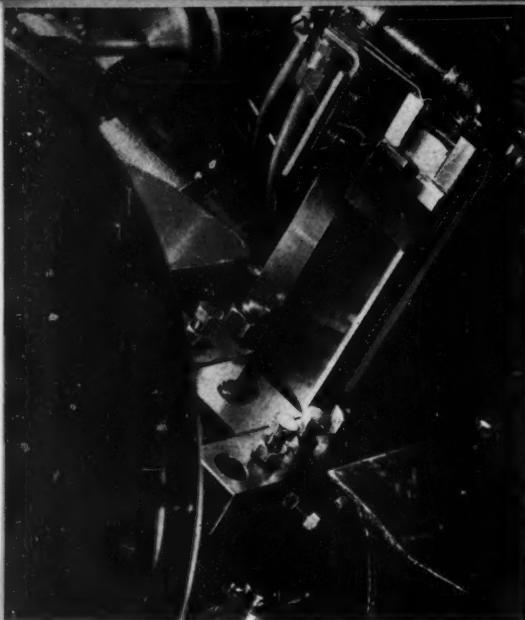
Data on piston ring and cylinder bearing phenomena indicates burnishing may be a prelude to failure
